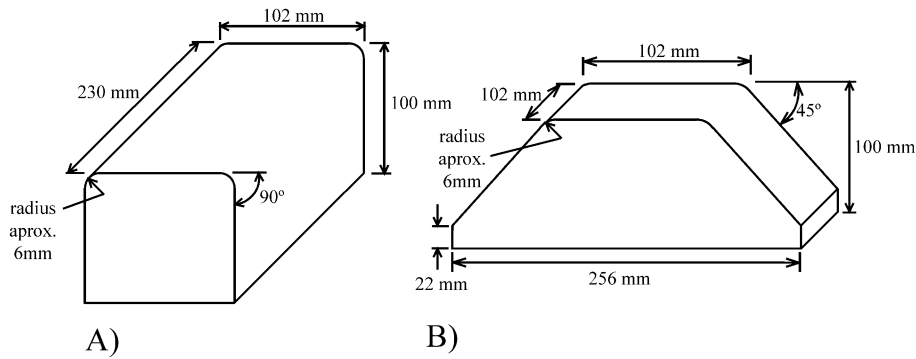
Geometry of the tools used in this study: (a) 90° tool, (b) 45° tool.
